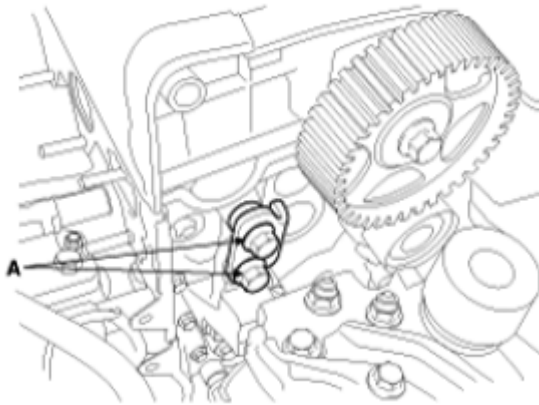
Identifying Engine Mounting Support Bracket Fixing Bolts
